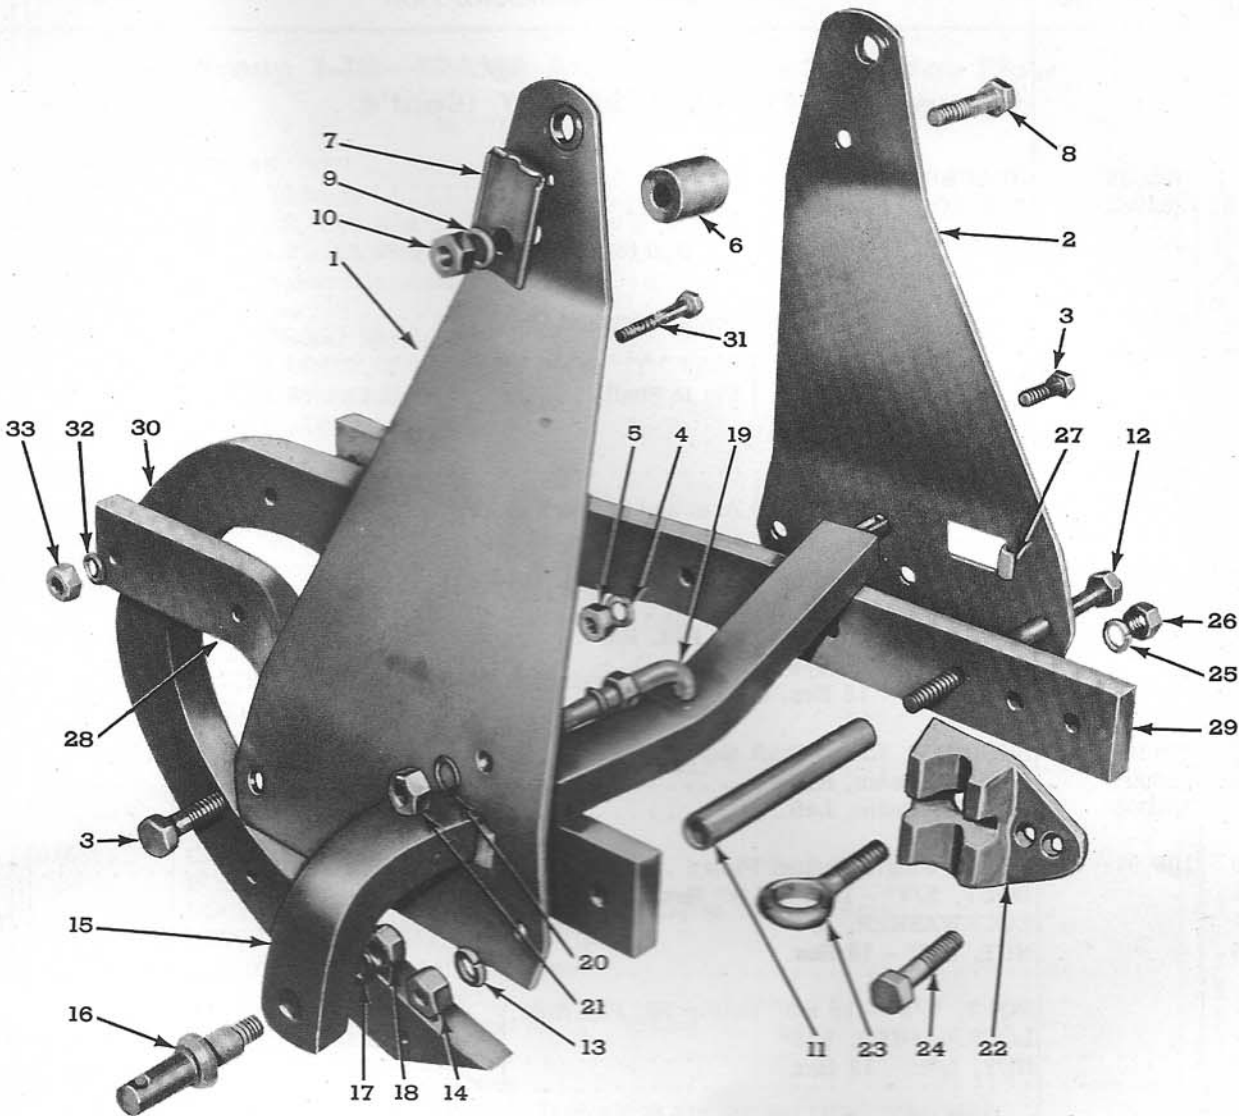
Frame Assembly, Single Bottom Economy Plow
